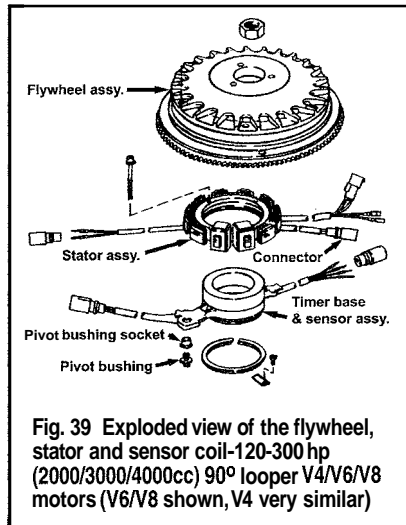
Exploded view of the flywheel, stator and sensor coil-120-300 hp (2000/3000/4000cc) 90° looper V4/V6/V8 motors (V6/V8 shown, V4 very similar)
